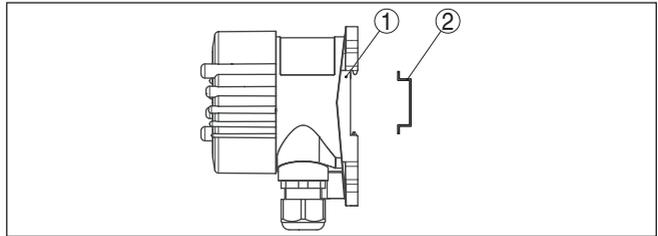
VEGADIS 82 with plastic housing for carrier rail mounting
